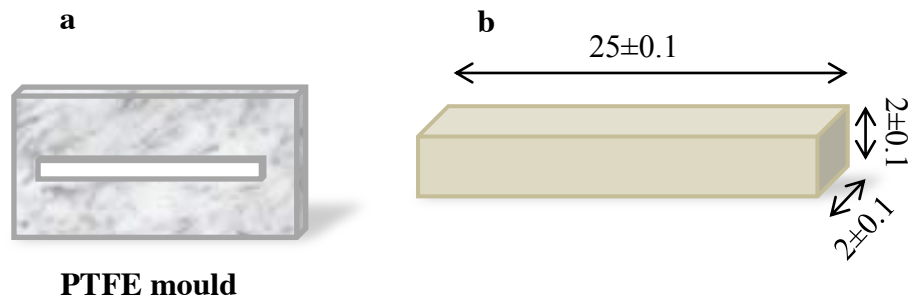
Schematic drawing of PTFE mould used to fabricate TFS specimens (a) and sample dimensions in mm.
